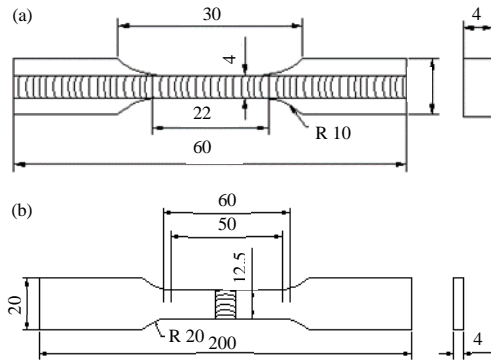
a) Longitudinal tensile test specimen and b) transversal tensile test specimen
